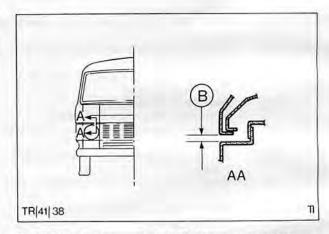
Hood setting – underside of hood to crossmember clearance B – 7,5±1,5 mm
